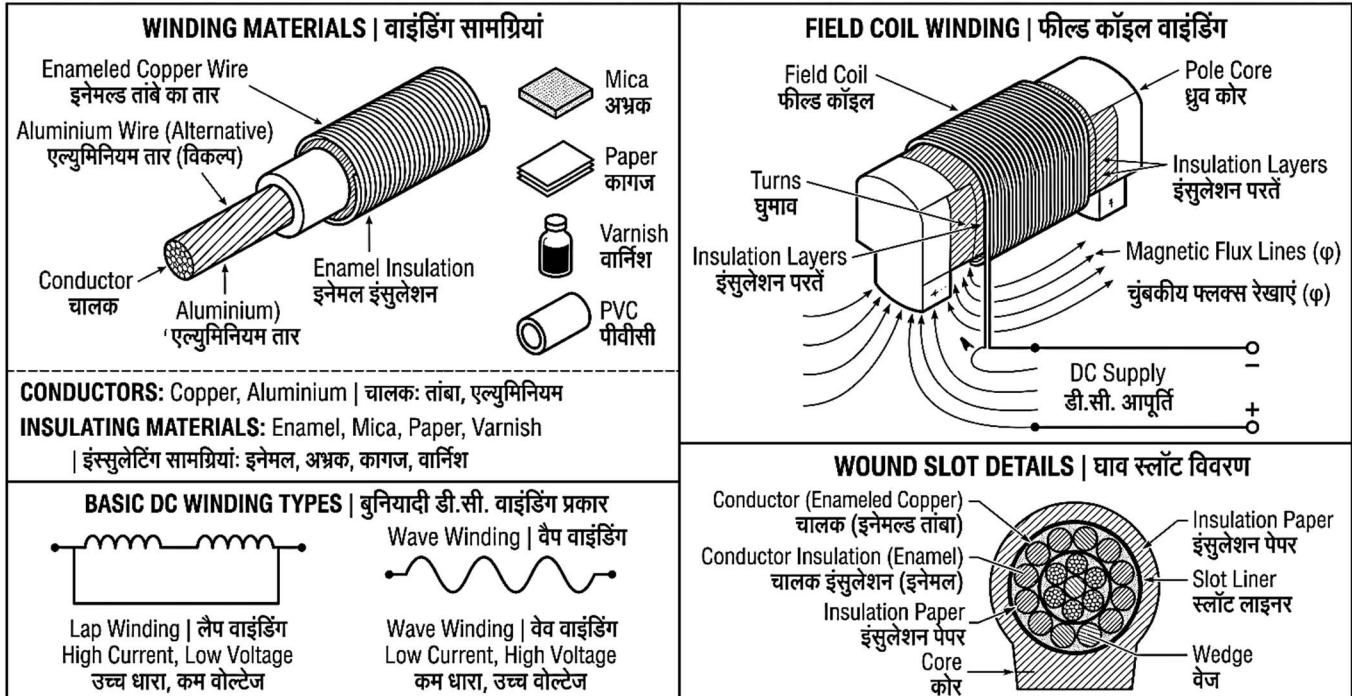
Materials Used for Winding and Field Coil Winding in DC Machines | डी.सी. मशीनों में वाइंडिंग के लिए प्रयुक्त सामग्री एवं फील्ड कॉइल वाइंडिंग
